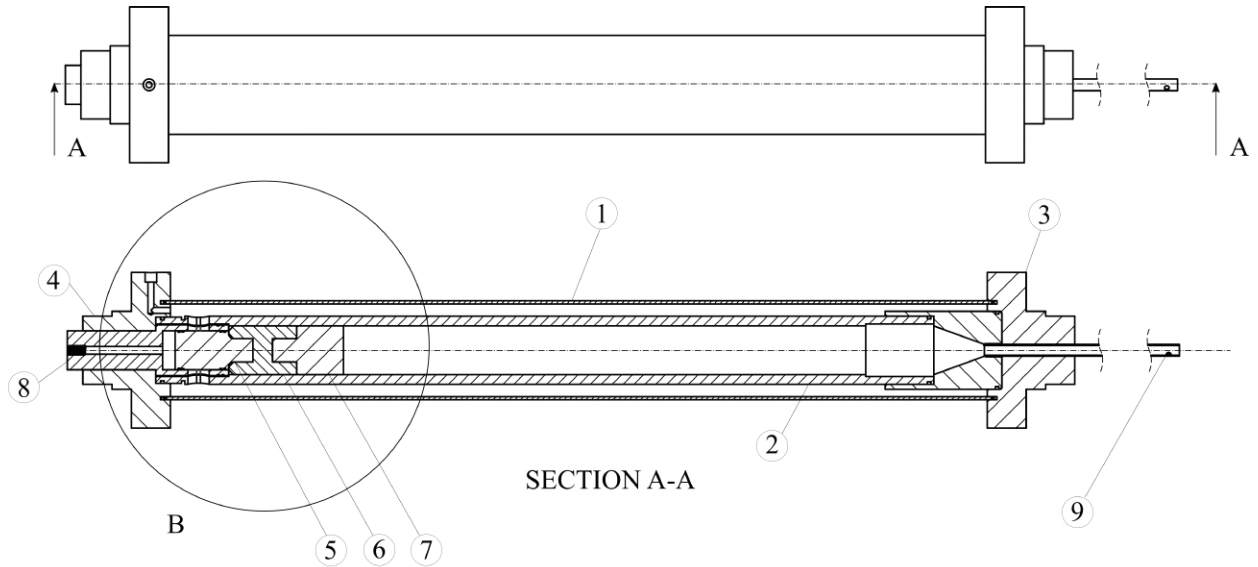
Schematic showing the front view and section view of the two-stage gas gun used in the impact experiments, designed by Cloete et al.[81].
